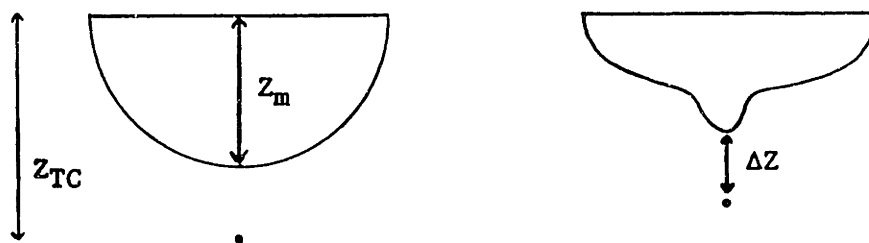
Theoretical and actual weld pool cross-sections. TC is thermocouple location.
